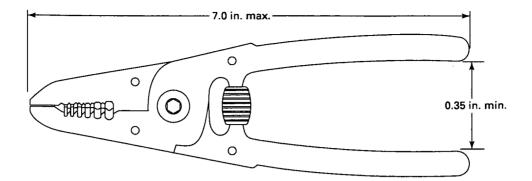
Type II, Class 1, Wire Cutter/Stripper, Small Frame, Strippers Forward of Pivot, Nonadjustable, With Spring and Lock Optional
